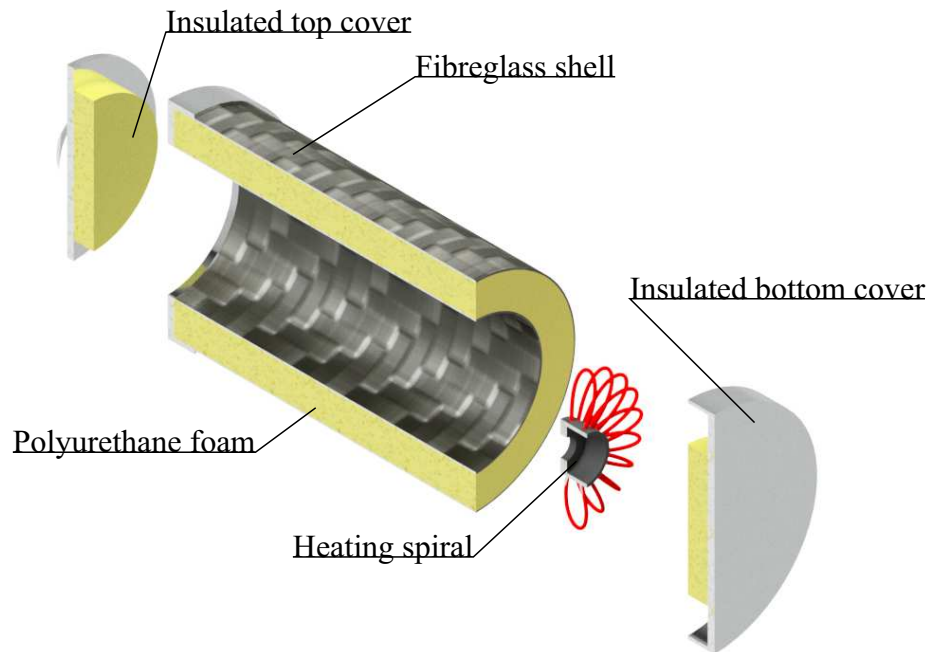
Scheme of final prototype of heating chamber. The inner diameter is 20 cm and the outer 30 cm, height of the chamber is 45 cm. The bottom cover contains cable connections for spiral power supply and thermocouple connector
